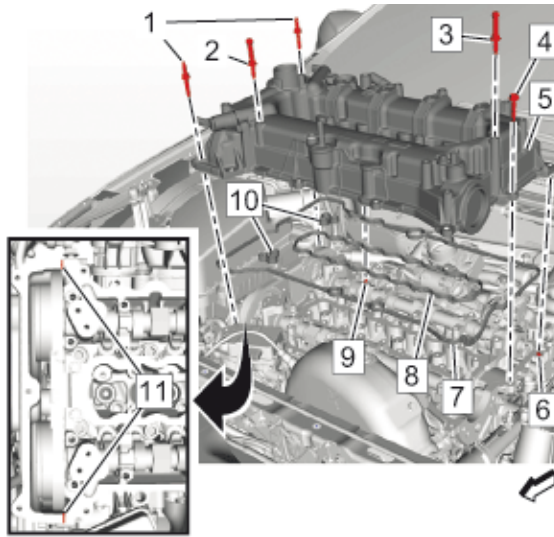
Camshaft Cover, Studs, Bolts And Gaskets
